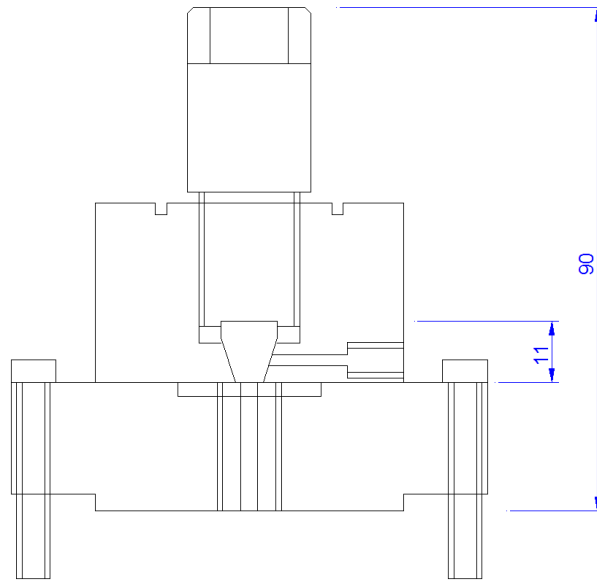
Diagram of Pressurising Valve and Assembly Lid (All Dimensions are in mm)
